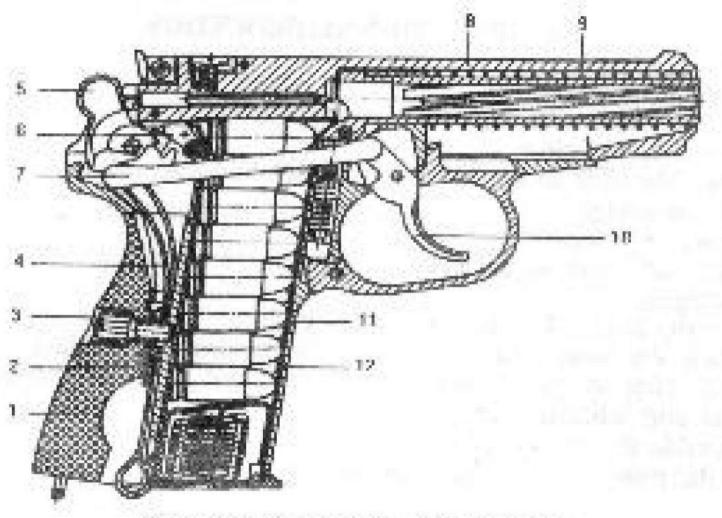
Diagram of mechanisms of U-70 twelve-shot pistol in 9 mm Makarov or Kurz caliber.
